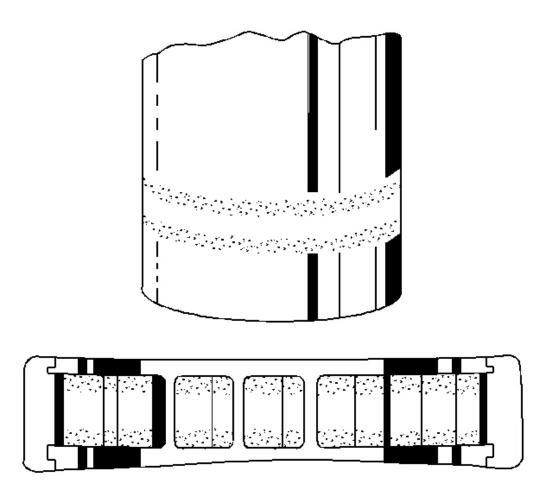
Identifying Double Edge Pitting Courtesy of GENERAL MOTORS CORP.
